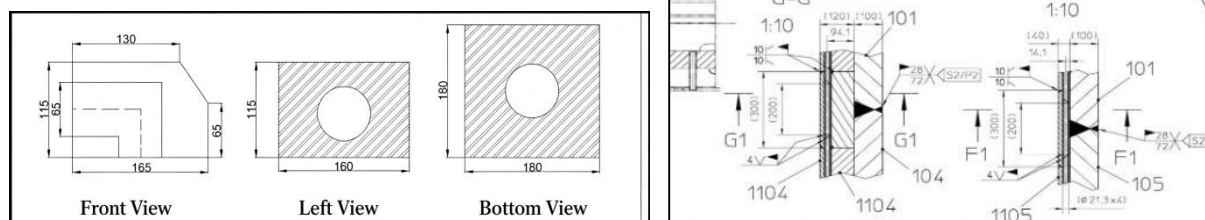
Processing drawing of flushing port and hydraulic wear pipe.
